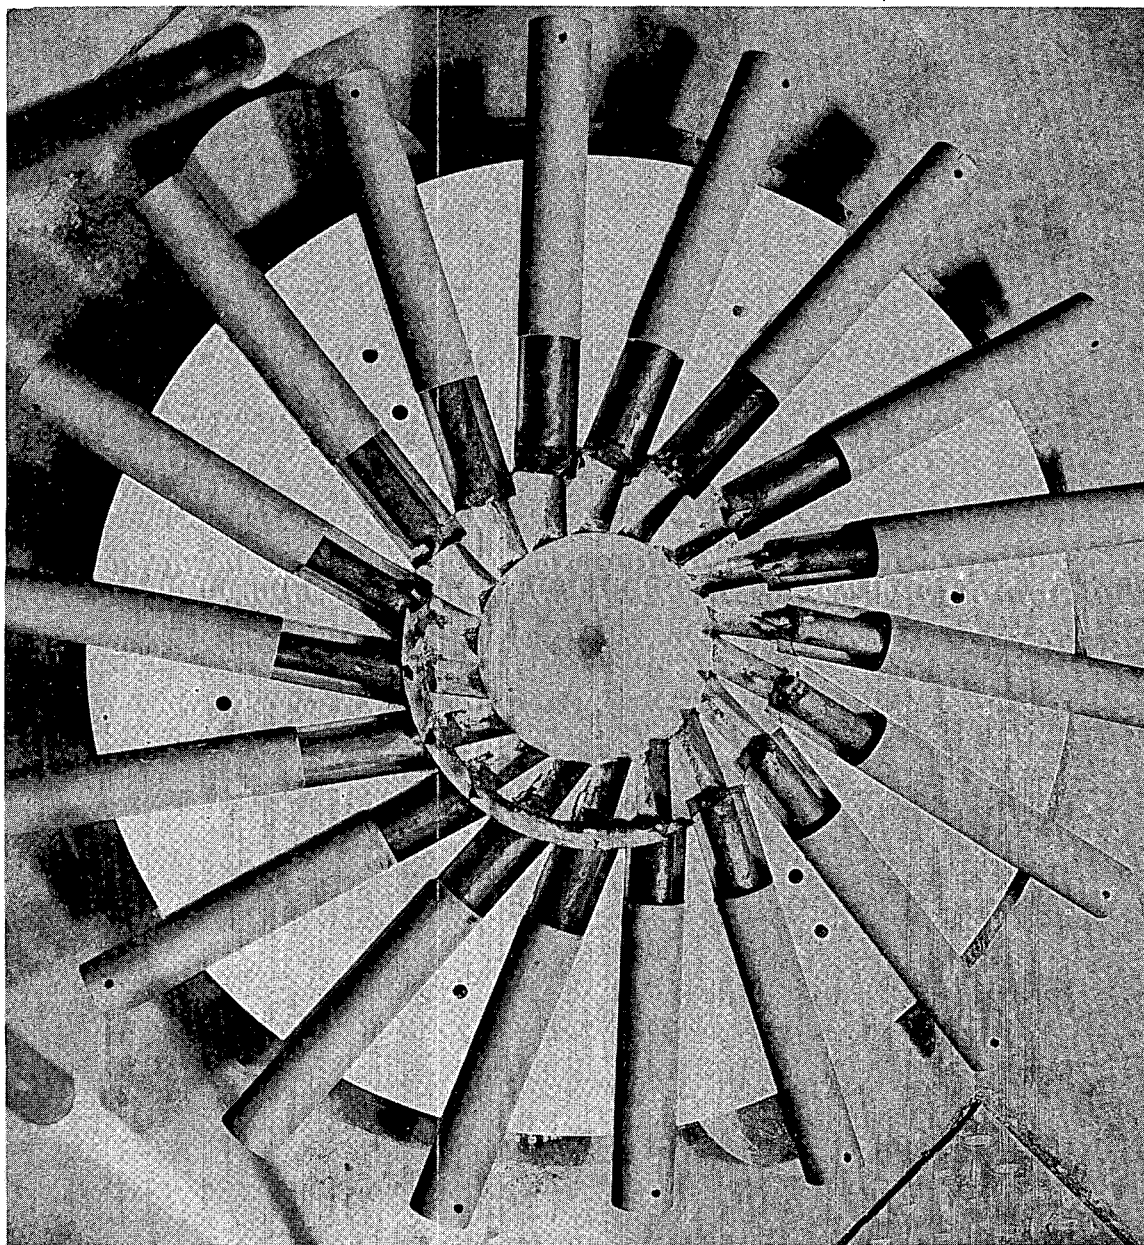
ALUMINUM MOLD CONTAINING HOLLOW CASTINGS. SLEEVES HAVE BEEN PULLED OUT TO EXPOSE SLUGS.
